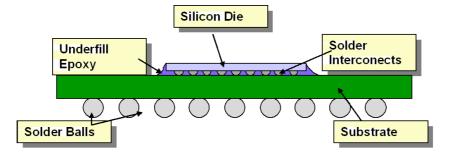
Flip Chip Ball Grid Array (FCBGA)
